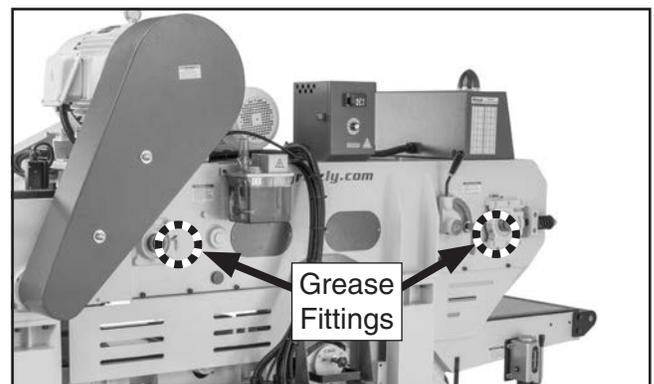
Location of feed track roller bearings grease fittings—leftside.
